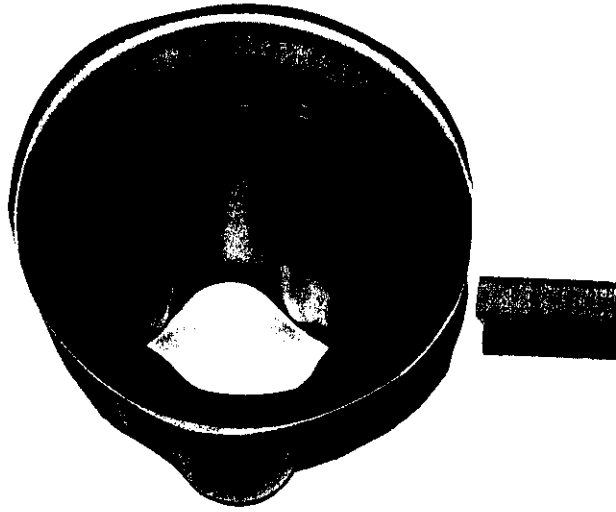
Appearance of drawn body of R304S (By courtesy of Endo Manufacturing Co., LTD.)
